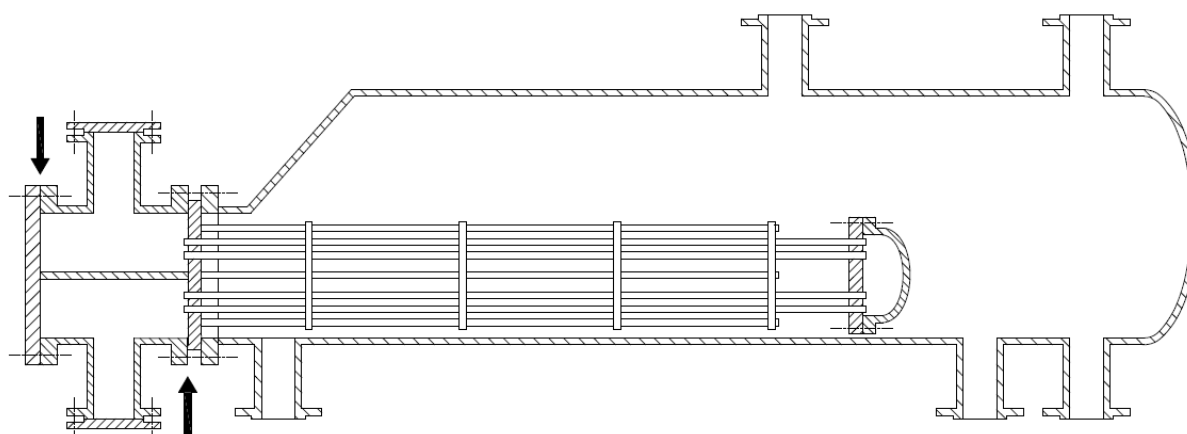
Testing of Heat Exchanger with U-tubes, having Shell Design Pressure higher than the Design Pressure of Tubes
